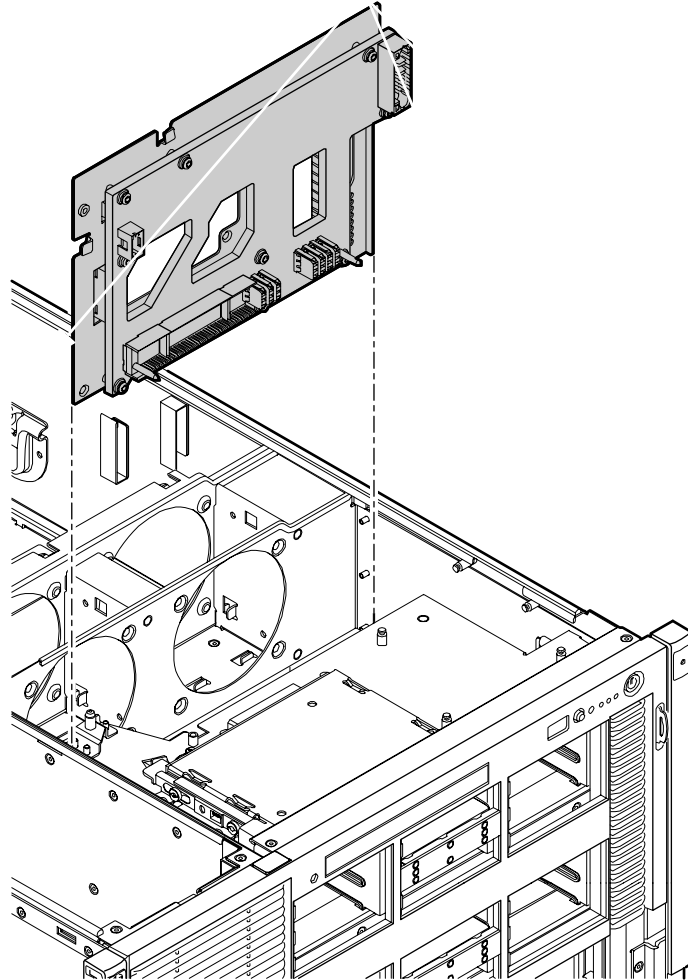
Midplane Board Screw Location (Front of Chassis)
